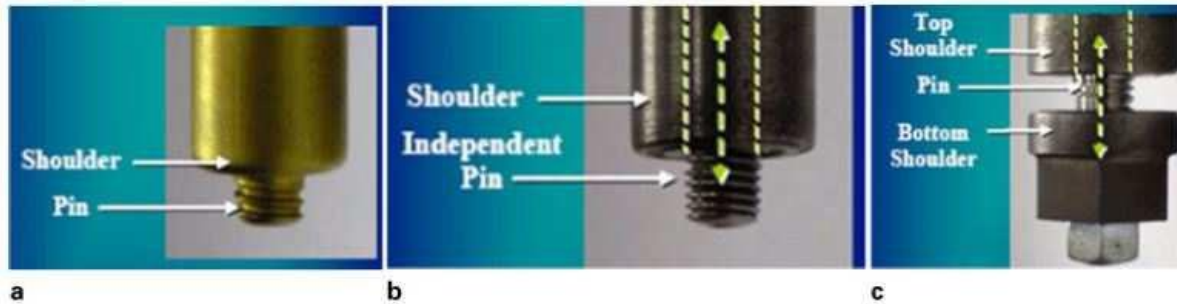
FSW tool types (a) fixed, (b) adjustable and (c) bobbin [8].
